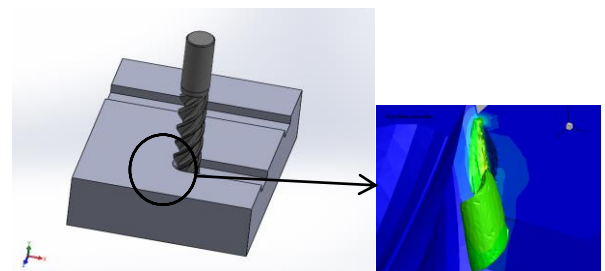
3D Milling and view of the chip removed and temperature distribution on a tooth.
